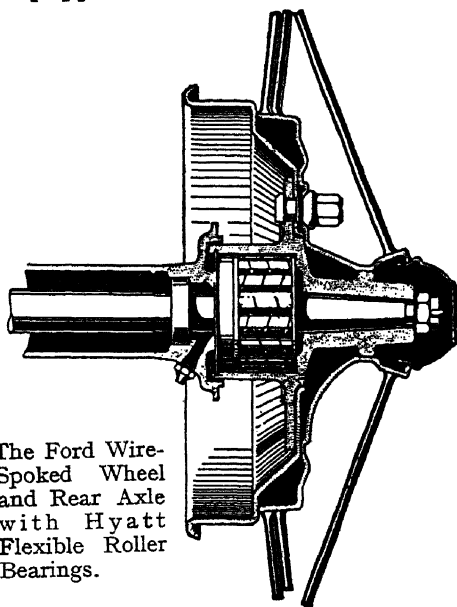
The Ford Wire-Spoked Wheel and Rear Axle with Hyatt Flexible Roller Bearings.
